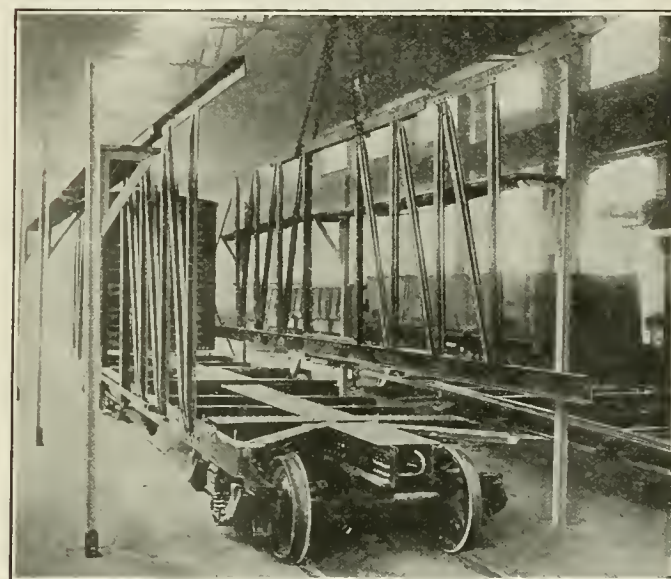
PLACING THE SIDE FRAMES IN POSITION
